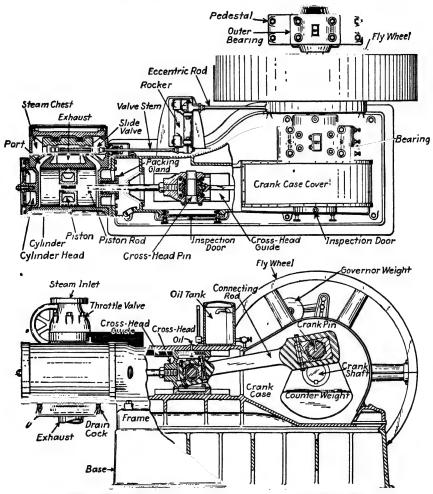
Ames side-crank, simple, slide-valve steam engine.
